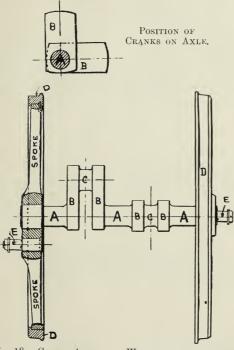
CRANK AXLE AND WHEELS FOR AN INSIDE LOCOMOTIVE. A Axle. B Crank Webs. E Coupling Rod Crank Pins. E Coupling Rod Crank Pins.
